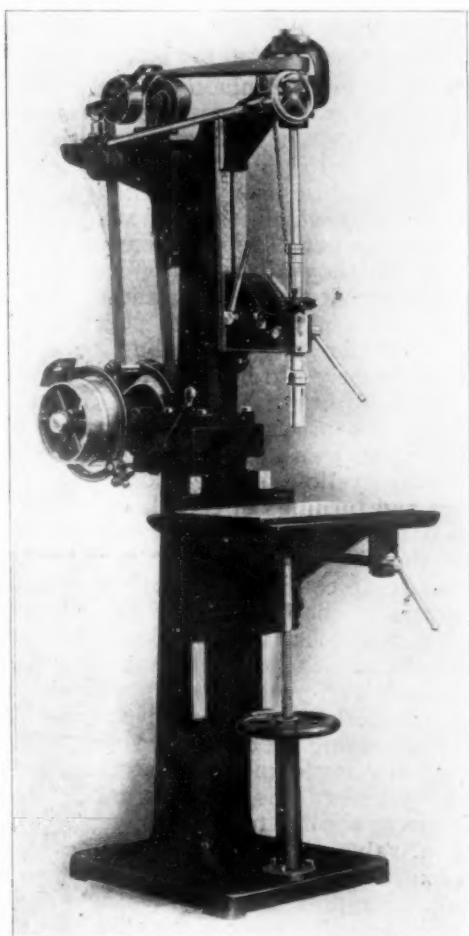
DRILL PRESS USED ON SHRAPNEL. MANUFACTURED BY HENRY & WRIGHT MANUFACTURING COMPANY, HARTFORD, CONN.
